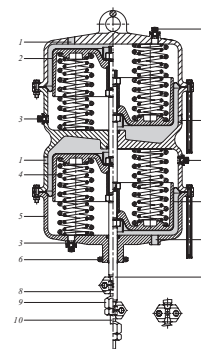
· Tandem actuator with 2 x 2800 cm²
